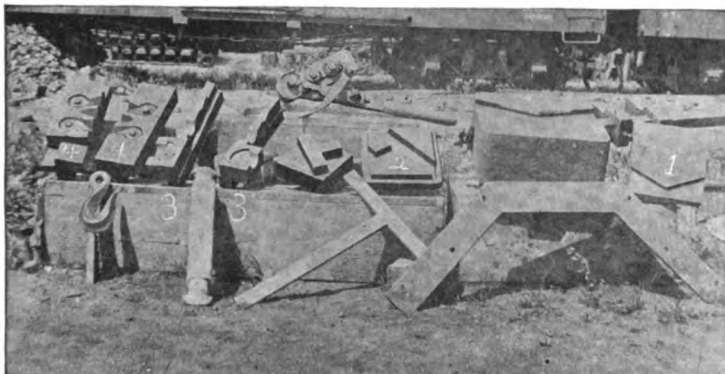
THE UPPERMOST TOOL IS THE ANVIL EYE-BENDING TOOL.
